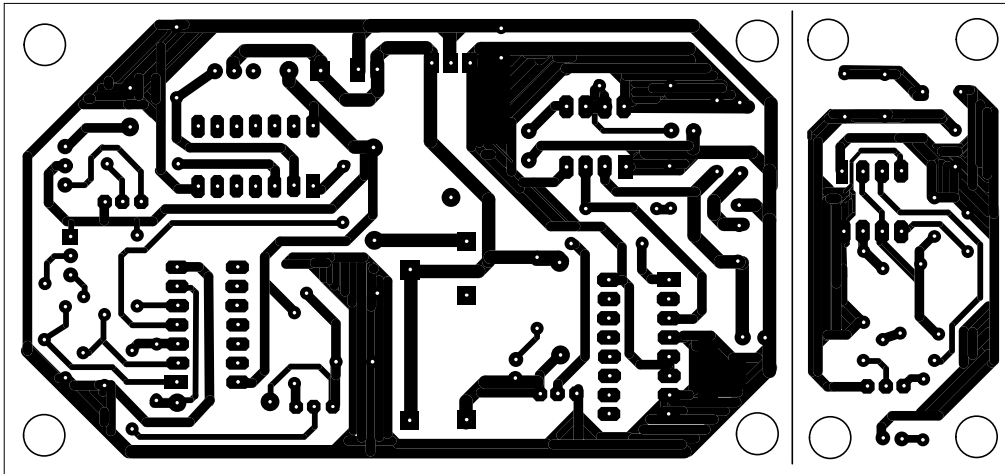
Actual-size, single-side PCB layout for two-wheeler security system
